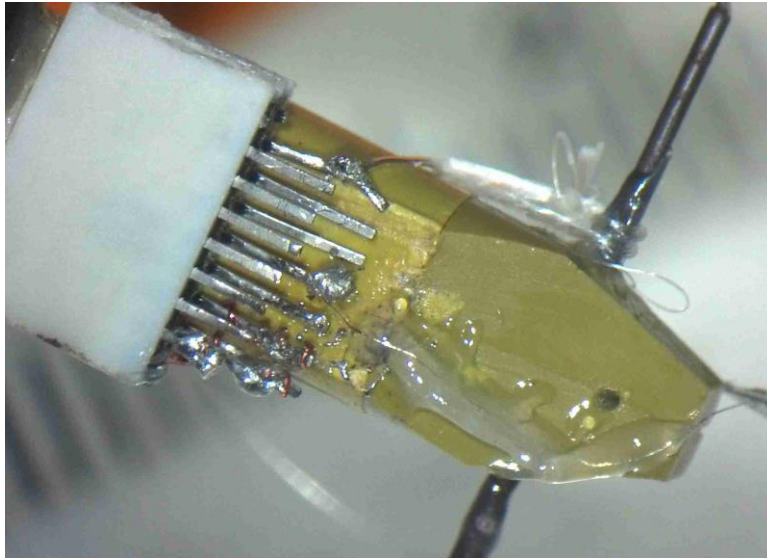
Solder the reference wire to pin 11 and glue in place.
